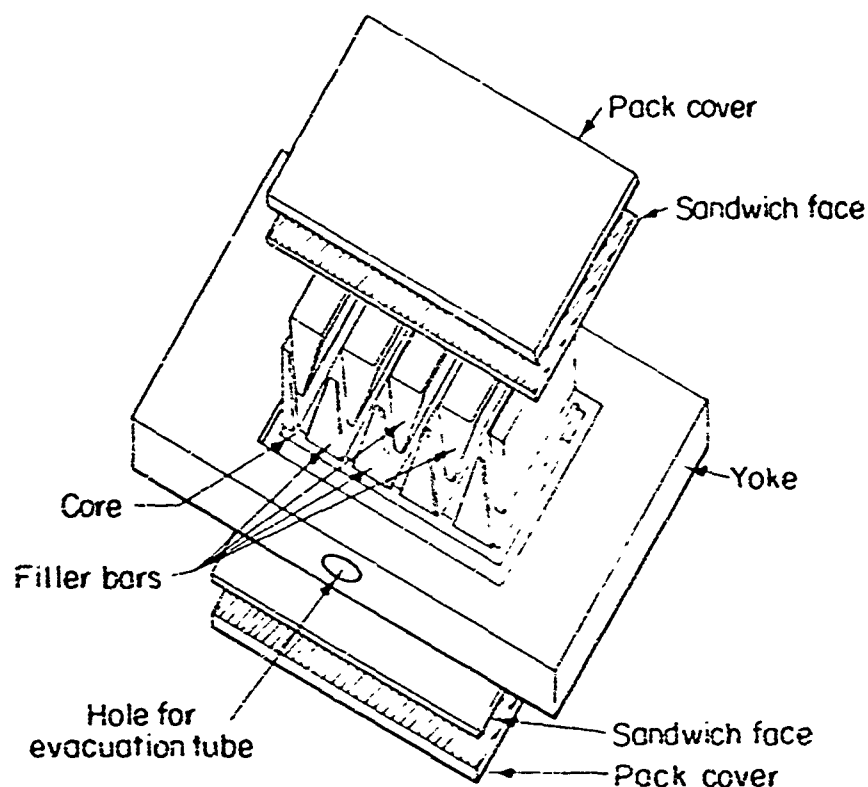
EXPLODED VIEW OF ROLL-WELDED PACK PRIOR TO HOT ROLLING (REF. 119)
